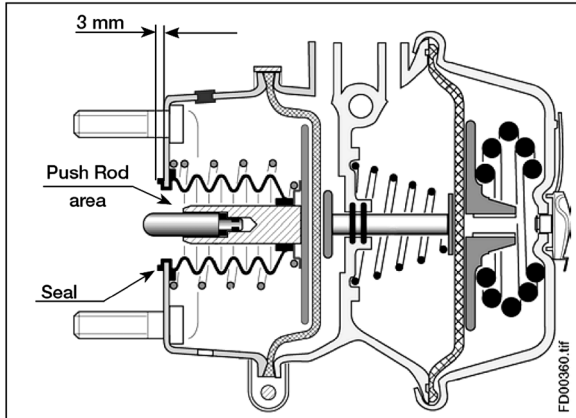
DRIVE AXLE BRAKE AIR CHAMBER
